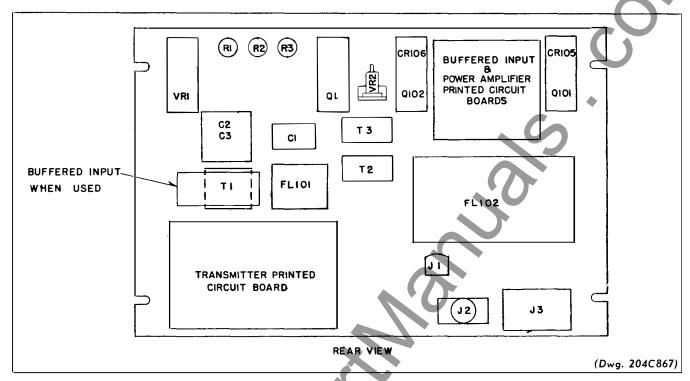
Component Locations of Type TCF Transmitter Assembly
